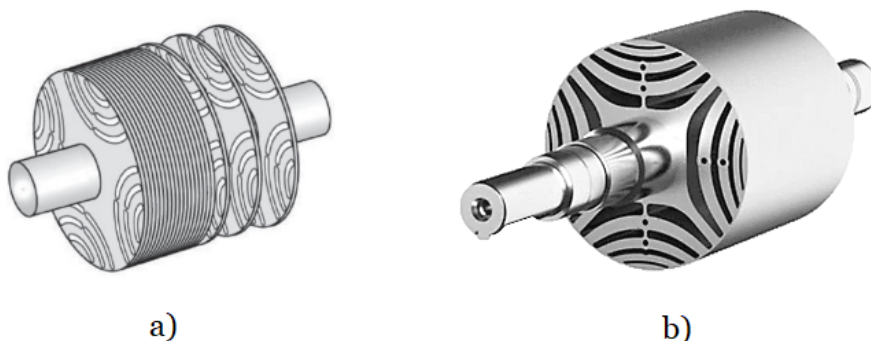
A TLA rotor – a) a sketch indicating the stacking of the sheets, b) in reality [8], [28] (edited).
